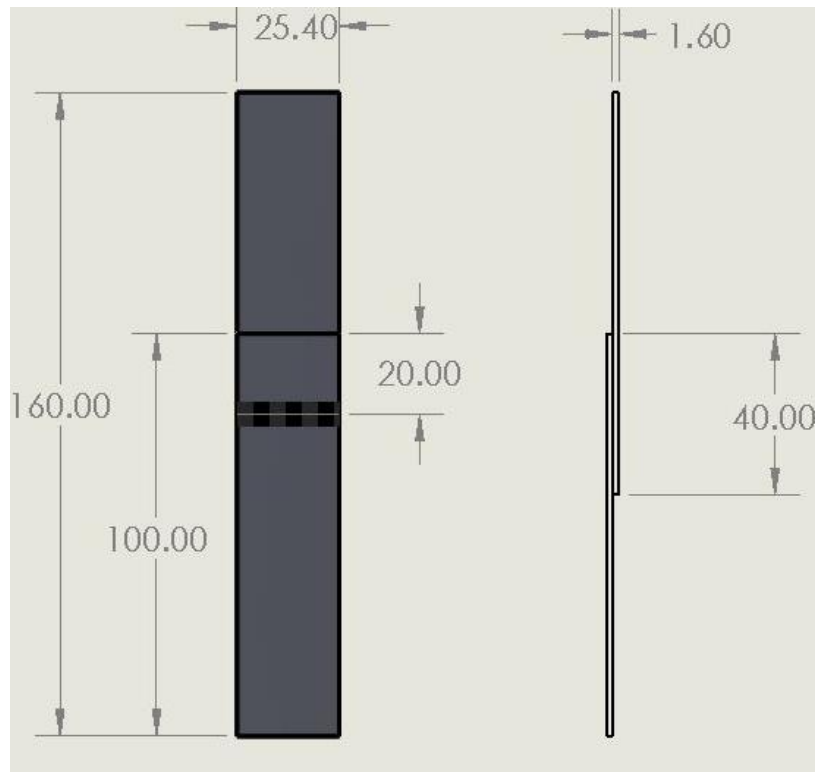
Dimensions of tensile shear test specimen (mm).
